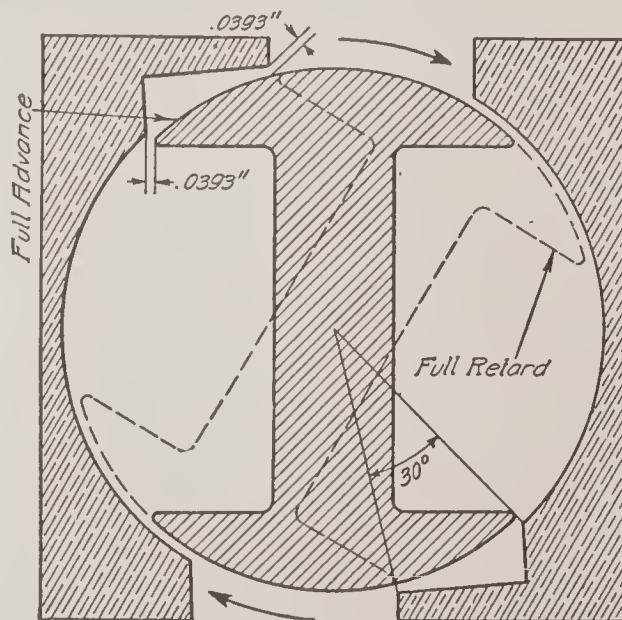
Section Simms Magneto Armature and Pole Pieces
